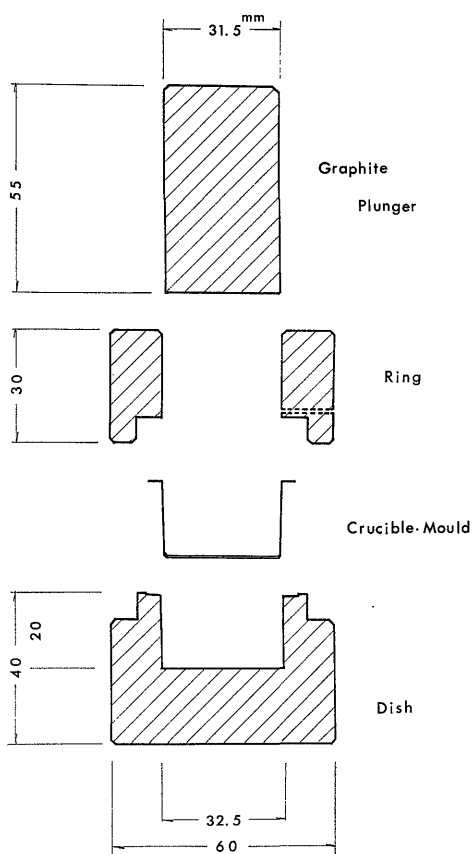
Drawing for a graphite container into which an Au-Pt crucible-mould (Fig. 3, 3-P) is placed. It is composed of three parts: a plunger, a ring with a small hole for measuring temperature by a thin-wire thermocouple, and a dish.
